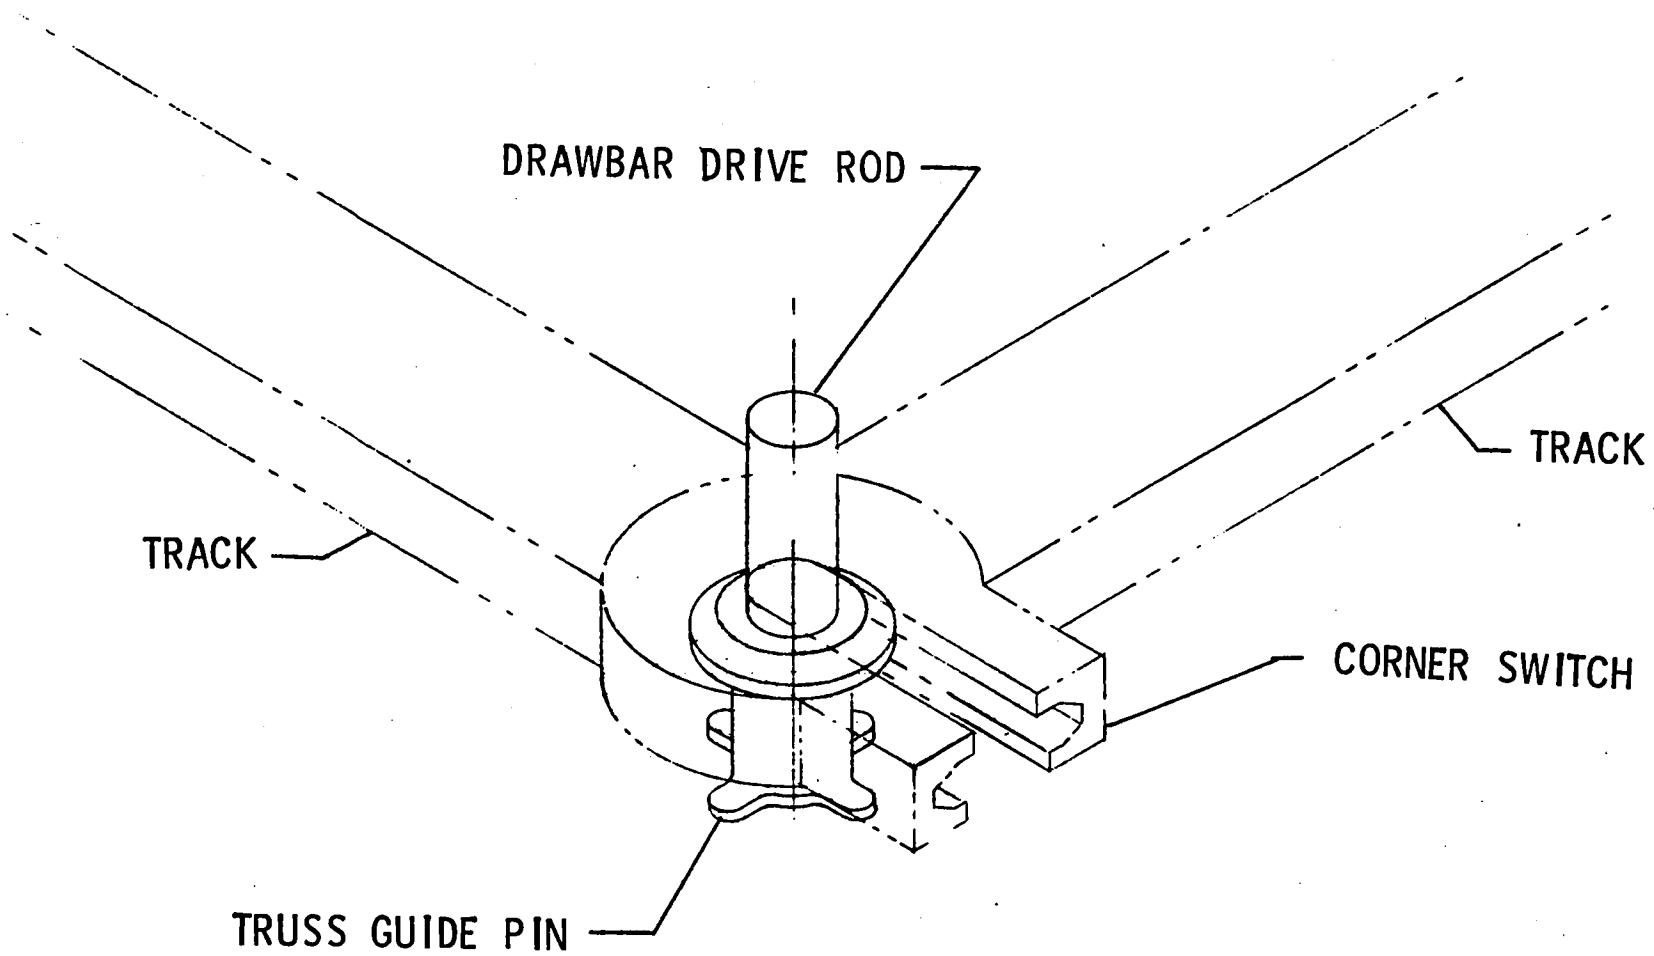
Corner Switch, Guide Pin, and Drive Rod Arrangement.
